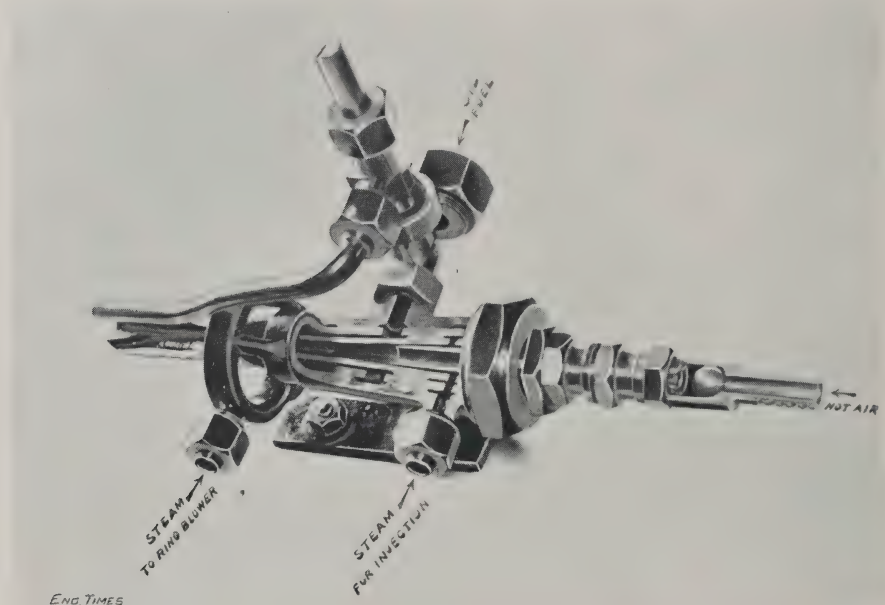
SECTIONAL VIEW OF LOCOMOTIVE PATTERN LIQUID FUEL INJECTOR. HOLDEN'S PATENT, 1900.
